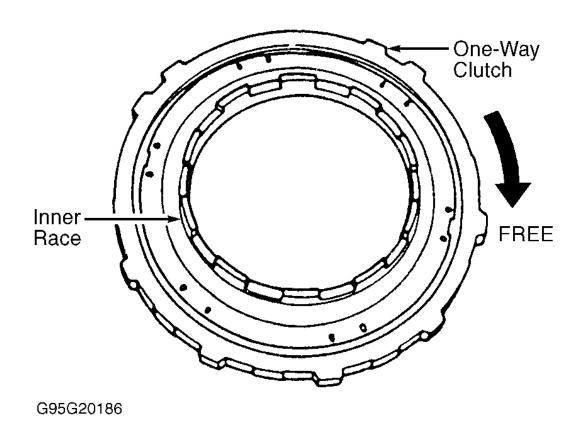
Checking One-Way Clutch No. 2 Operation Courtesy of MAZDA MOTORS CORP.
